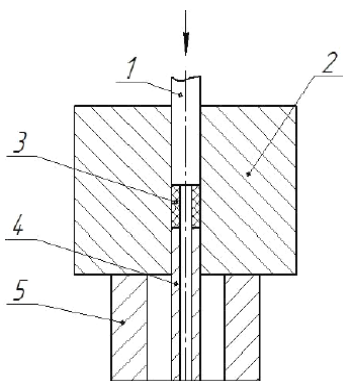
Diagram of double-sided pressing: 1 - upper punch; 2 - die; 3 - pressed charge; 4 - lower punch; 5 - backing plate
